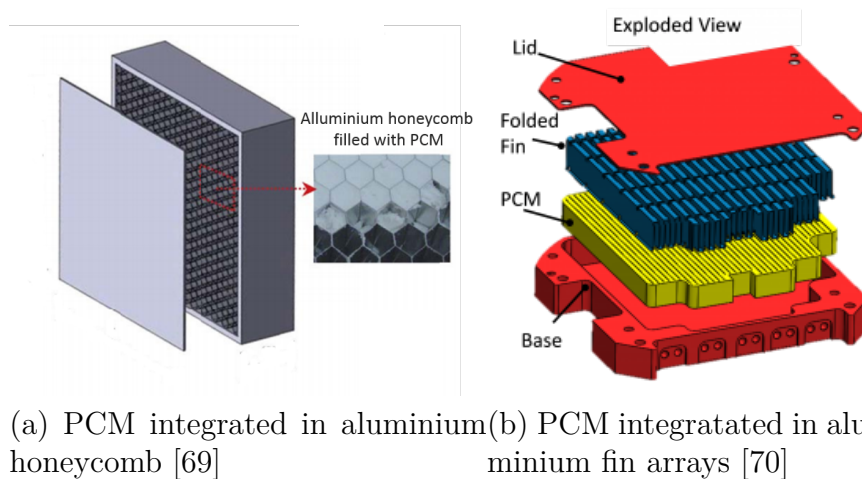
Examples of design techniques to embed PCM into aluminium heat sinks.
